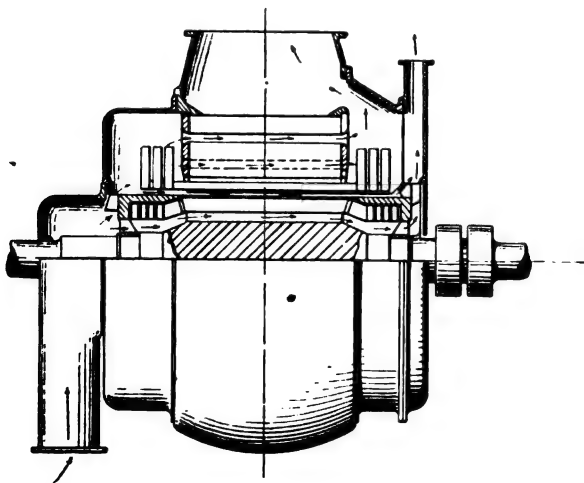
Scheme of Ventilation of Turbo-generator by means of Axial Holes ; Air passing from one end of Machine to other. (Messrs. Siemens Bros.)
